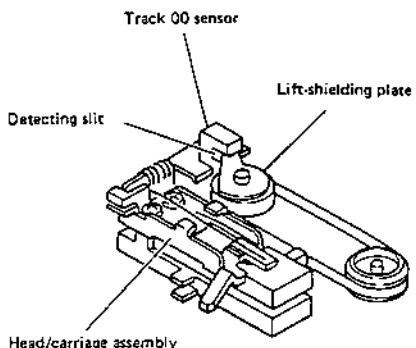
Track 00 Sensor and Head/Carriage Assembly
